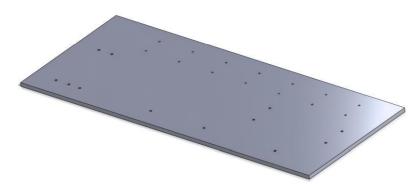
METAL BED OF CRANKSHAFT INSPECTION MACHINE
